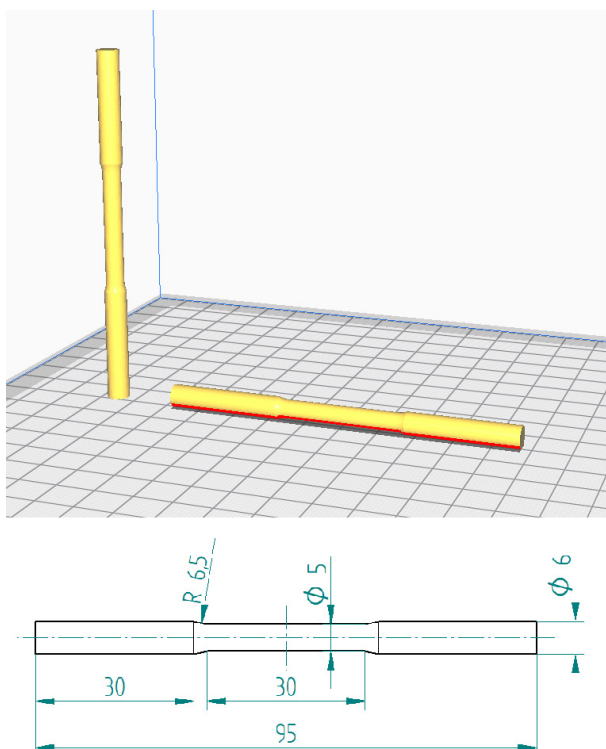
Printing layout (laying and standing position) and the geometry of the test specimen
